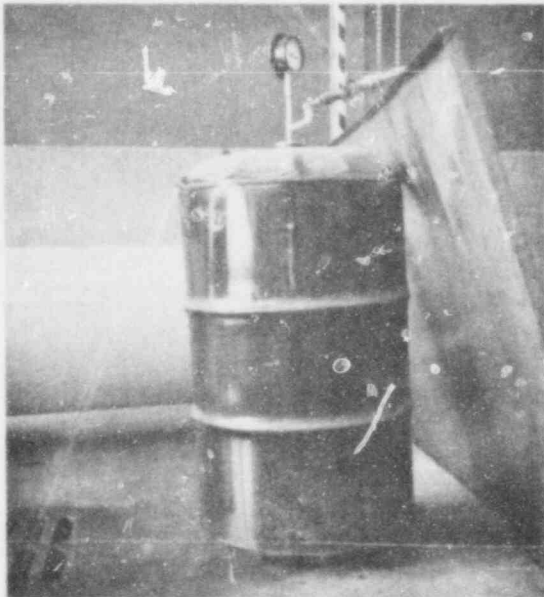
17C 16 Gage Fixed Head Drum Leaking At 90 PSIG.
